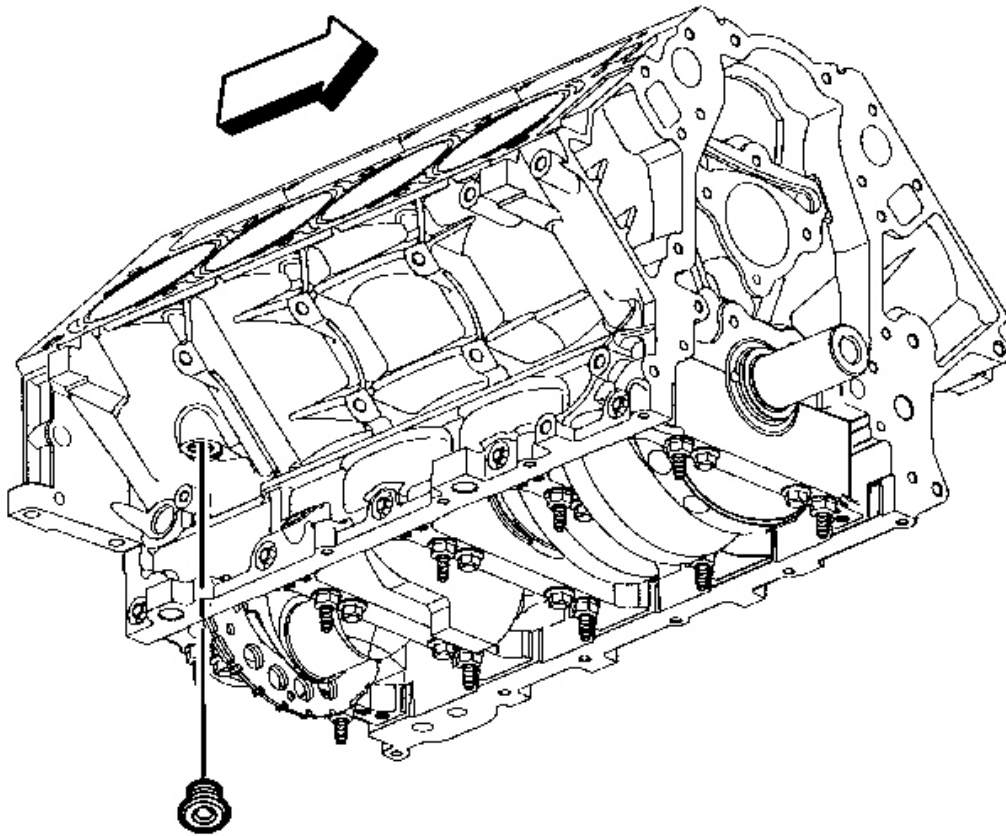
Right Rear Engine Block Coolant Drain Plug
